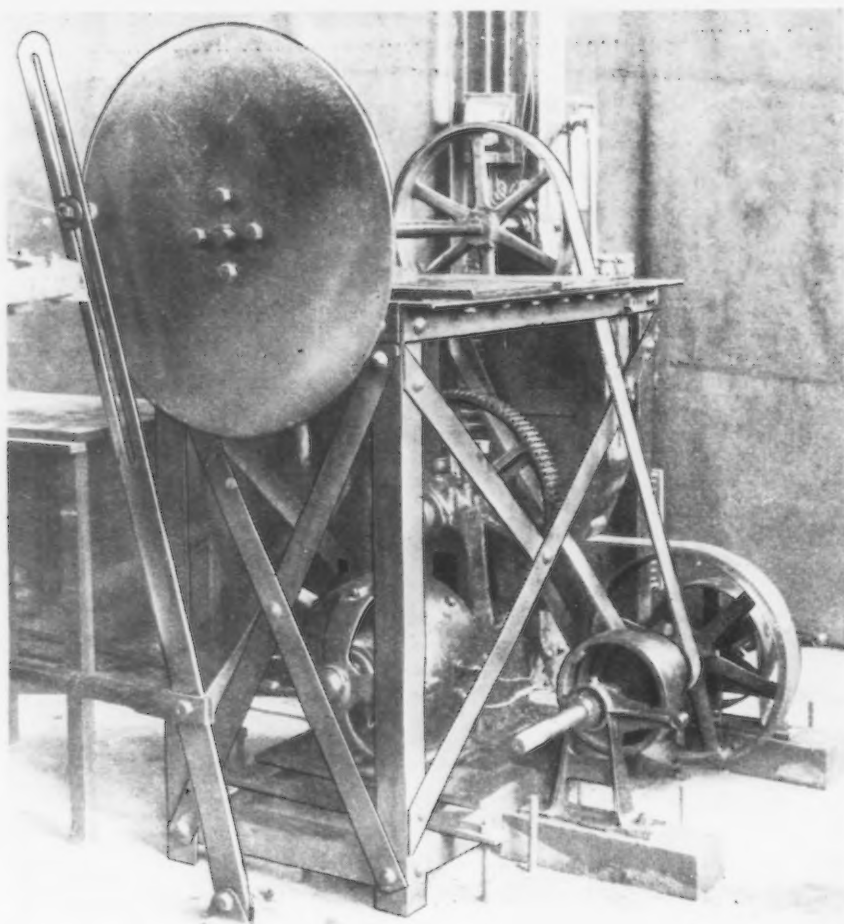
Motor Drive and Link Motion for Operating Hydraulic Valves
